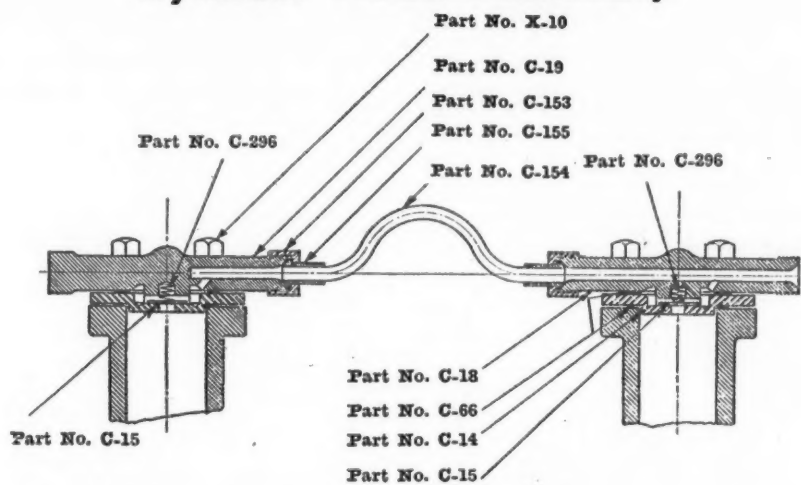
Cylinder heads showing disc valves and reseating springs.
